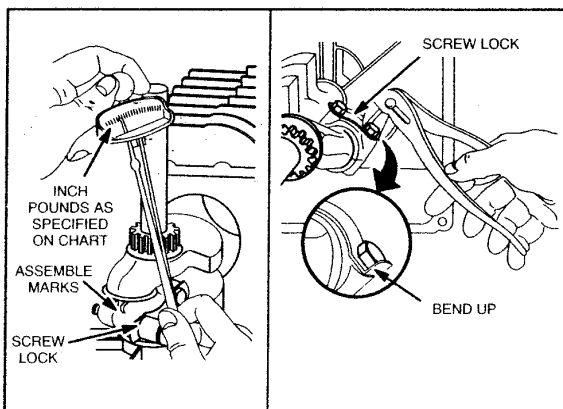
, Attaching the Connecting Rod to the Crankshaft
